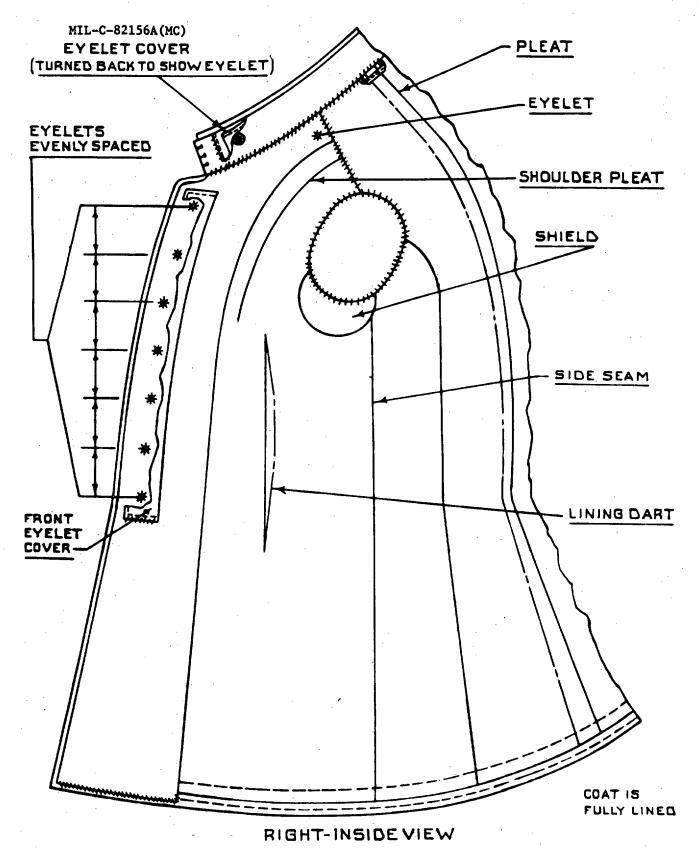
COAT, MANS: SCARLET, DRUM AND BUGLE CORPS; MUSICIANS
